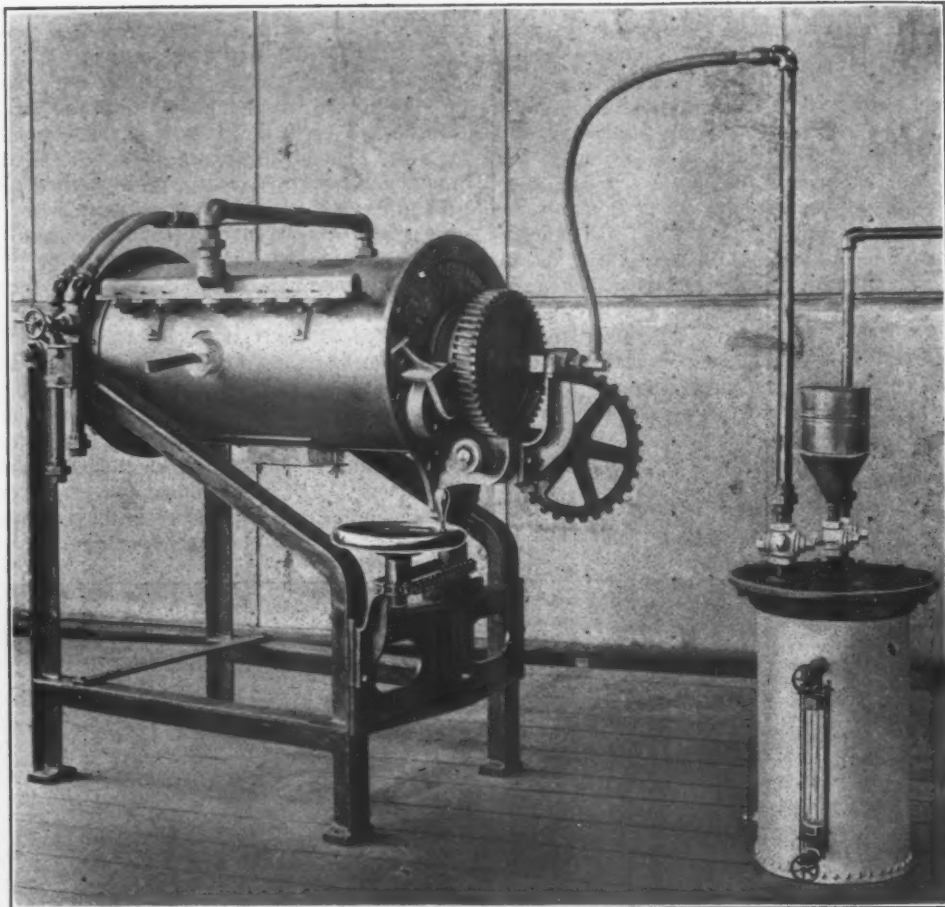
A Rear View of One of the Carbonizers and the Gas Producer.
